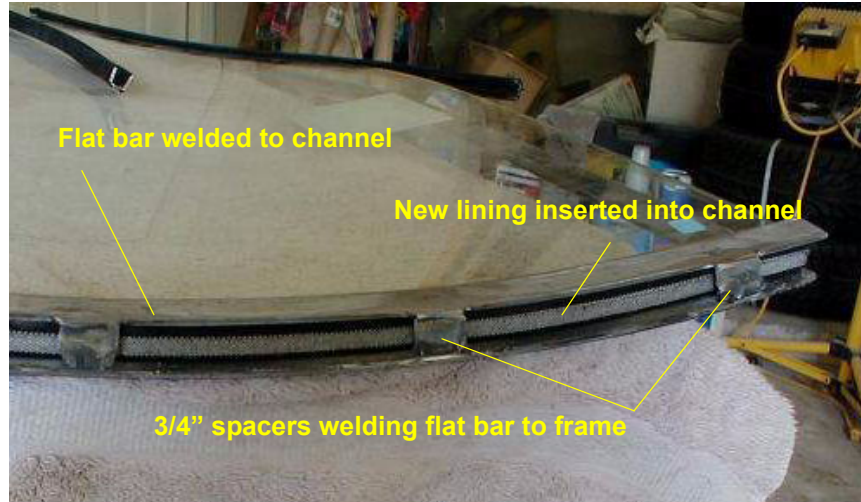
Flat bar welded to frame with new channel inserted
